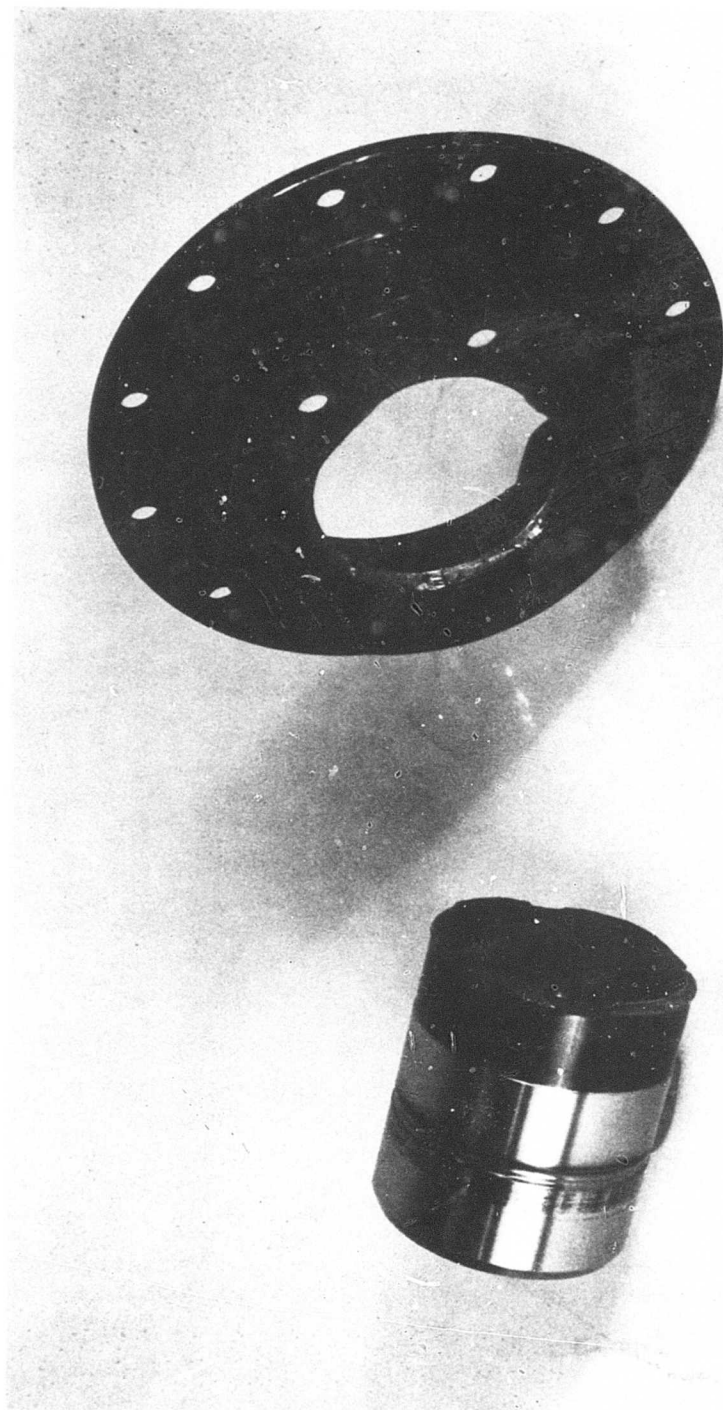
Adapter Flange Fracture, 100-Percent Speed Engagement Test.
